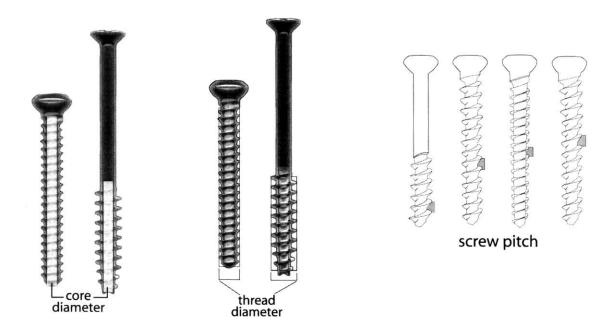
, 3 and 4. Core diameter, thread diameter, and screw pitch.
